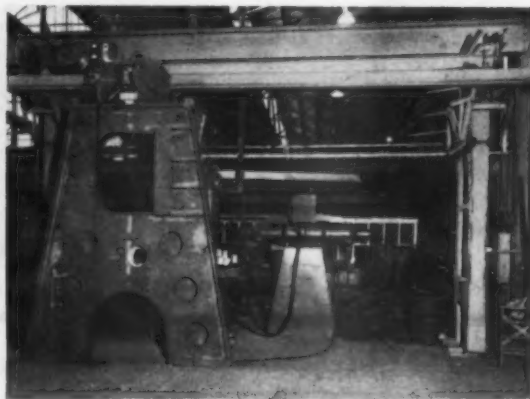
A 5,400 H.P. Doxford Diesel engine, of the type now being built by the Commonwealth Government Marine Engine Works, at Victoria. The Doxford is the largest Diesel ever built in this country, and incorporates a fabricated frame.
